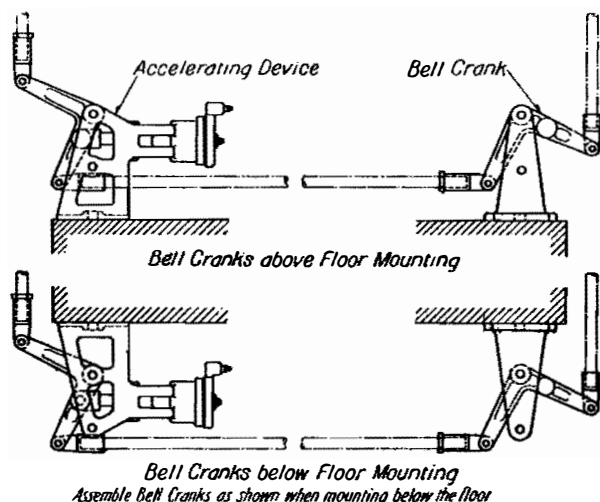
Automatic Remote Control Bell Crank Arrangement
